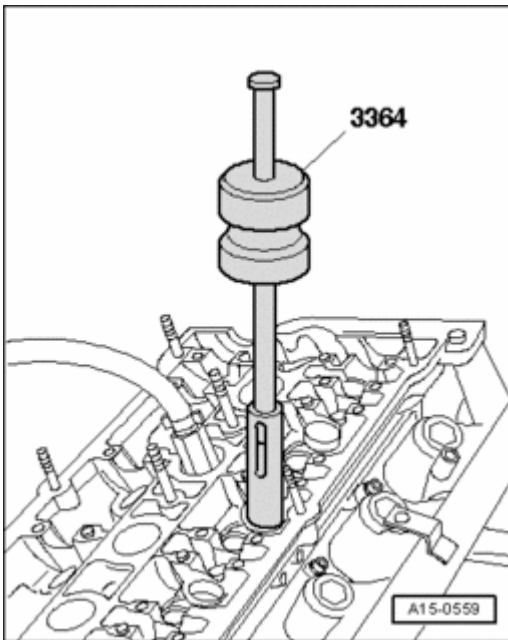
Pulling Off Valve Stem Oil Seals Using Valve Seal Removal Tool 3364
